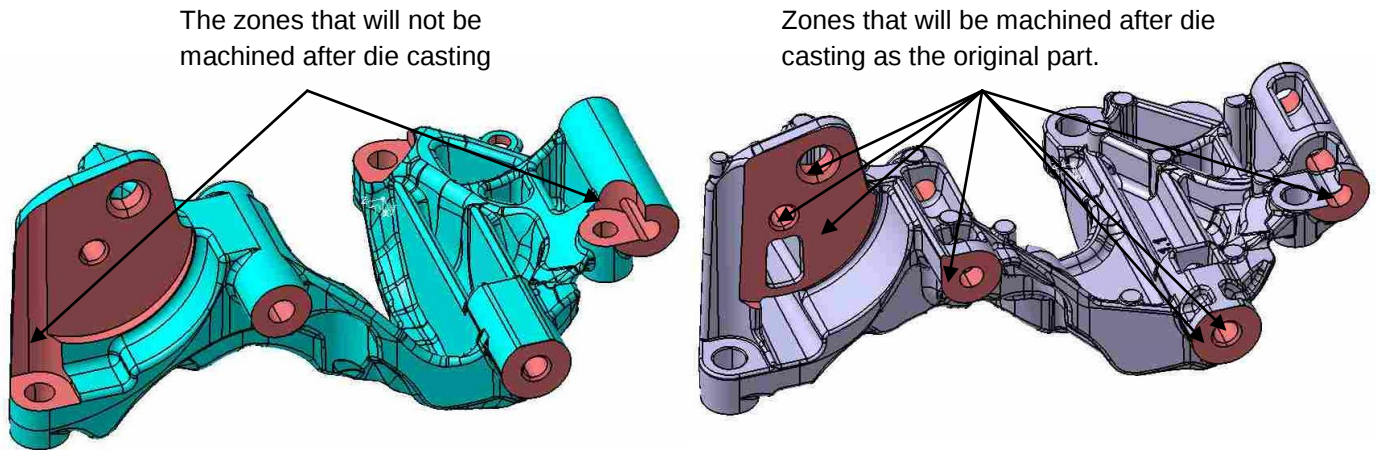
Developed parting line of the engine support accessories for die casting process
